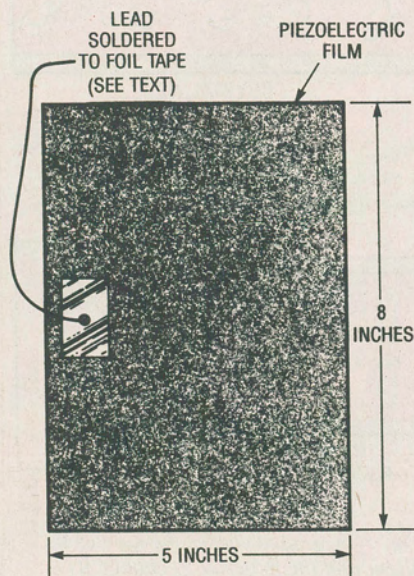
Solder a lead to a piece of copper-foil tape and then stick the tape on the piezoelectric film.
